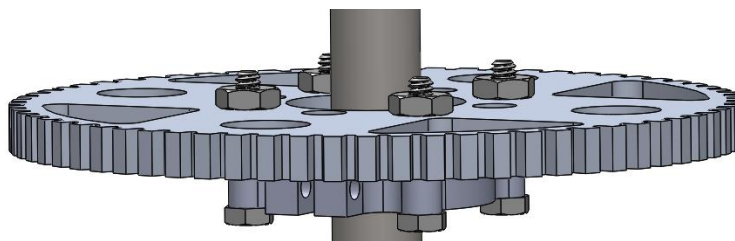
Assembly of clamping hub, hub adapter (not seen) and cap screws to mount gear
